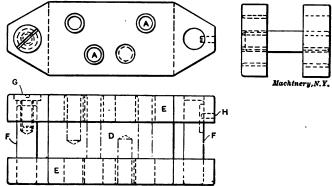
Simplest Form of Closed Jig for Drilling Work in Fig. 83
